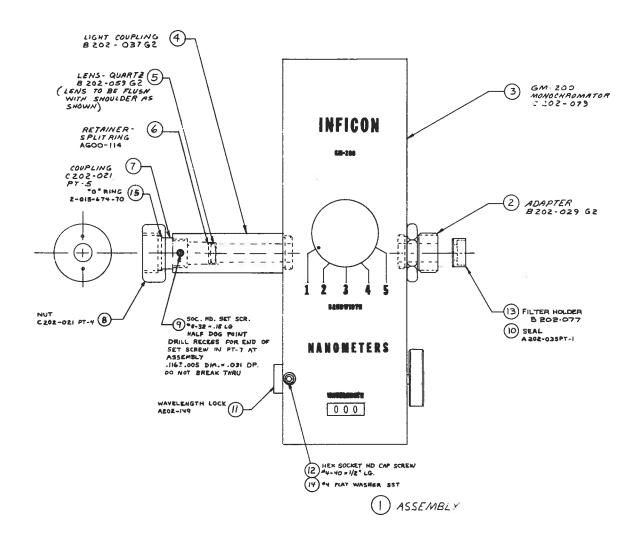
GM-200 Monochromator Assembly Drawing
